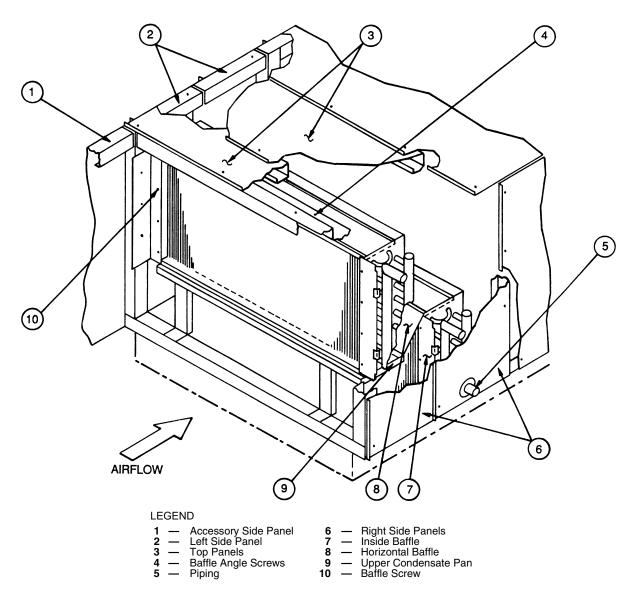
Horizontal or Vertical Unit — Dual Coil Removal (39LA,LD Units, Sizes 25)
